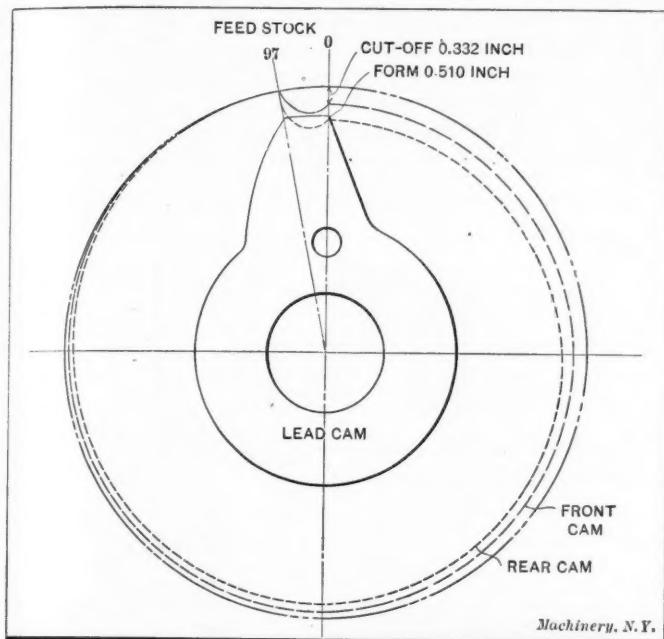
Cams for Making the Piece shown in Fig. 2 by the Method shown at B
